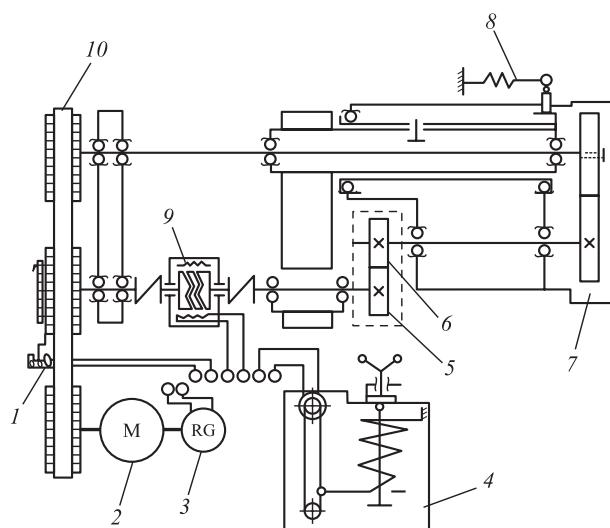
Basic kinematic scheme of the 2070 CMT-1 machine:
